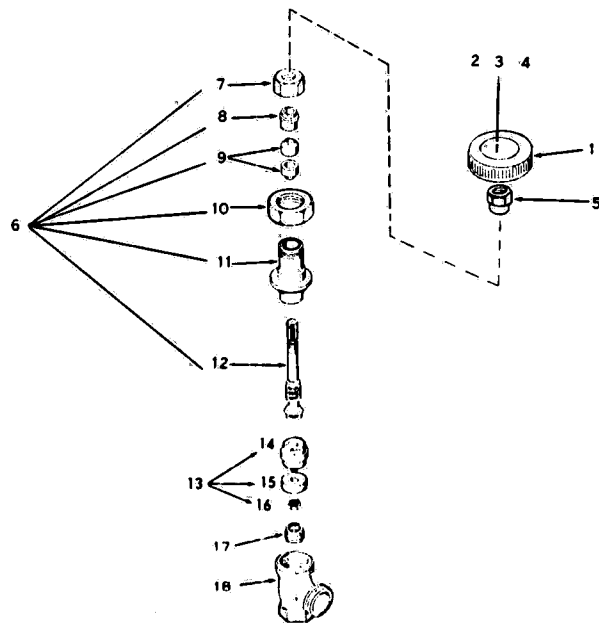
3/8" Union Angle Valve, Exploded View.
